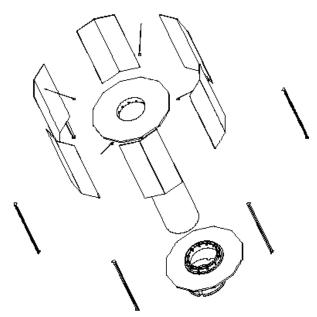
D UASat Preliminary Structure Design (Exploded View)
